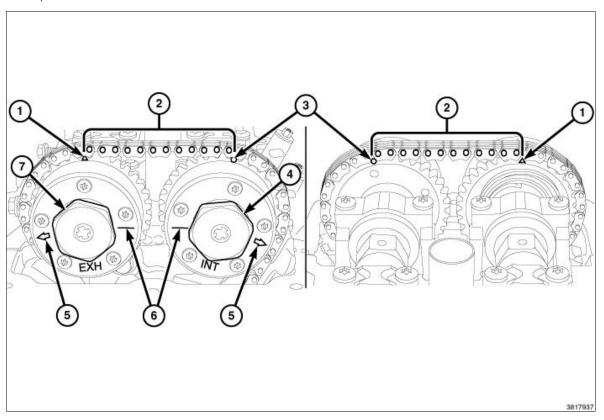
Right Side Cam Phaser Scribe Lines, Arrows & Cylinder Head Cover Mounting Surface
